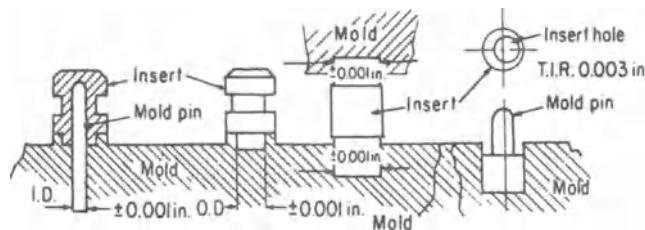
Either inside or outside diameters can be used to hold inserts in place during molding. Tight tolerance [± 0.001 in. (0.0025 cm) with a maximum TIR of 0.003 in. (0.0076 cm)] is required.
